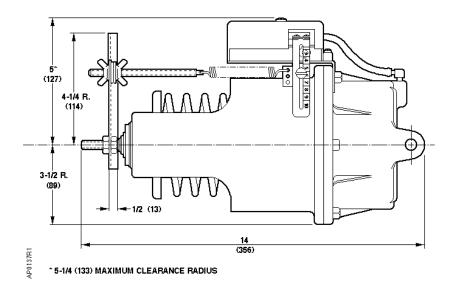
No. 6 Pneumatic Damper Actuator with the RL 147 Positioning Relay Mounted. Dimensions in Inches (mm).
